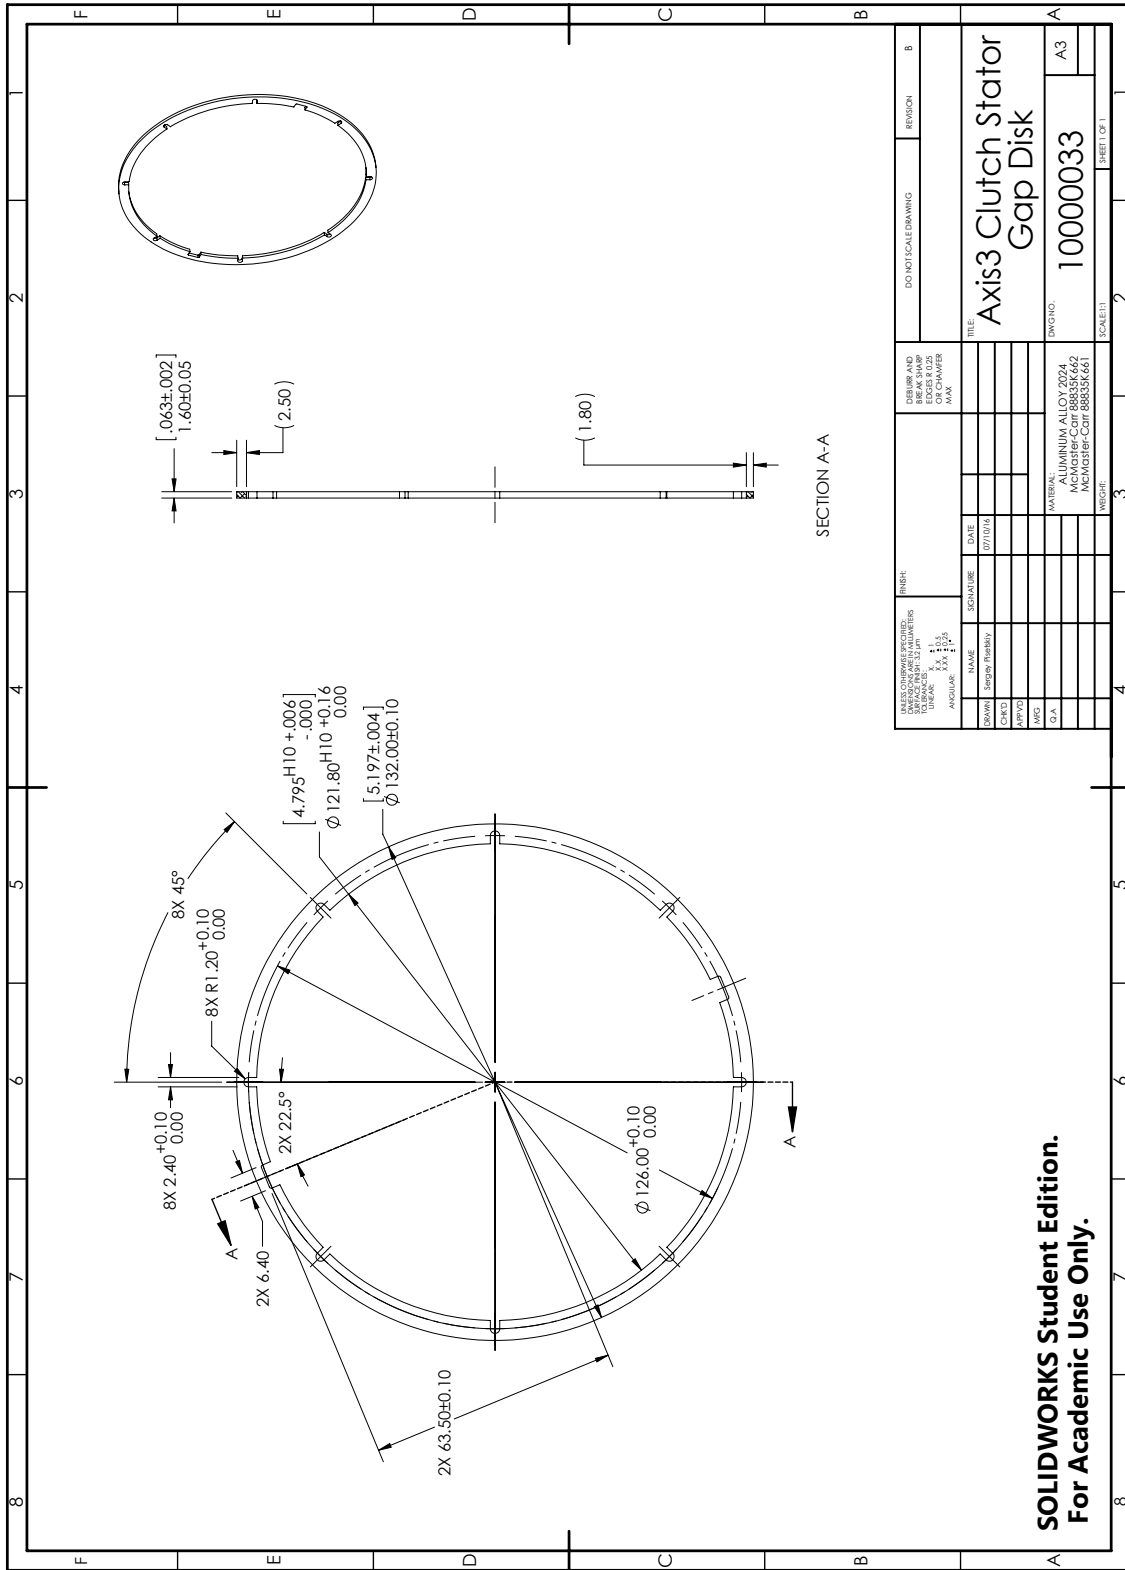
Drawing: Joint 3 clutch stator spacer.
